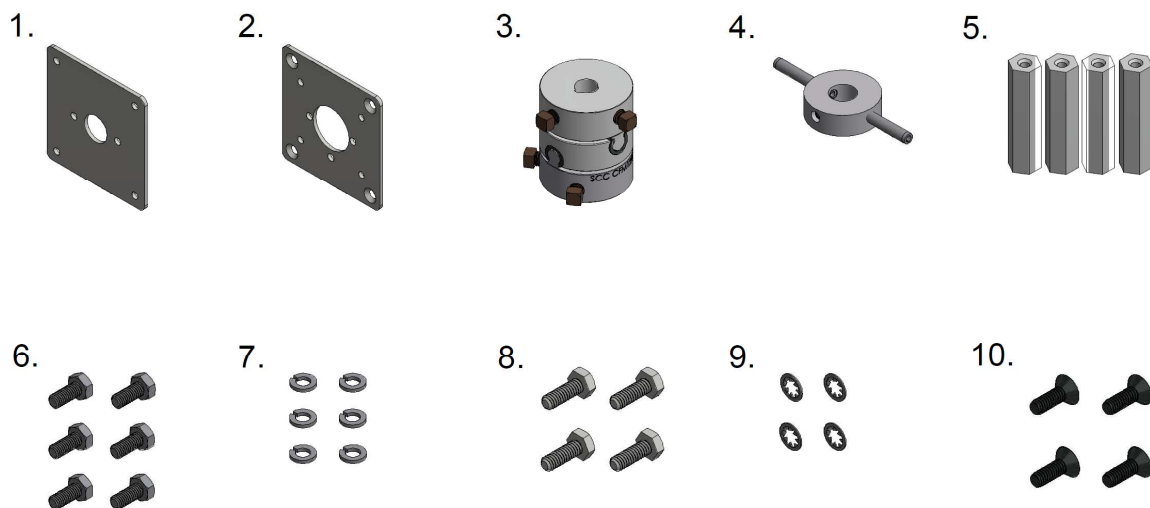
Pieces Supplied with the AGA94.2 Bracket Kit
